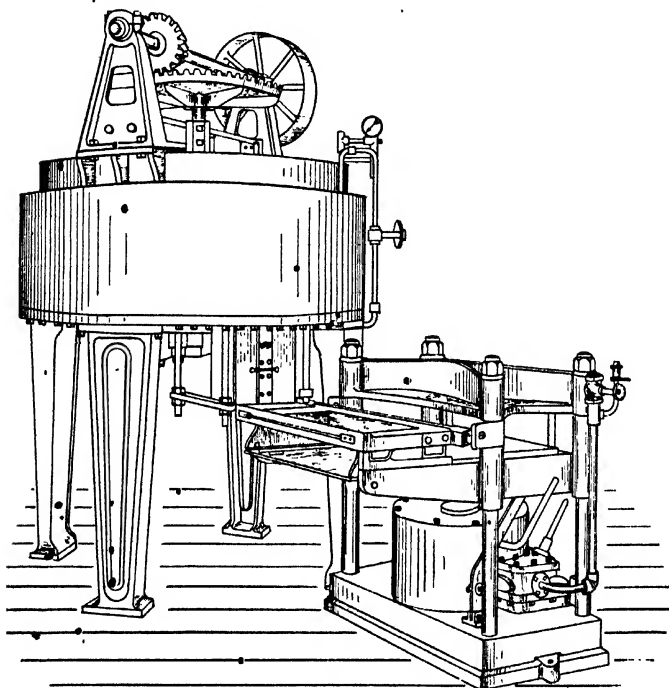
Kettle and moulding machine. (Rose, Downs & Thompson, Ltd., Hull.)
